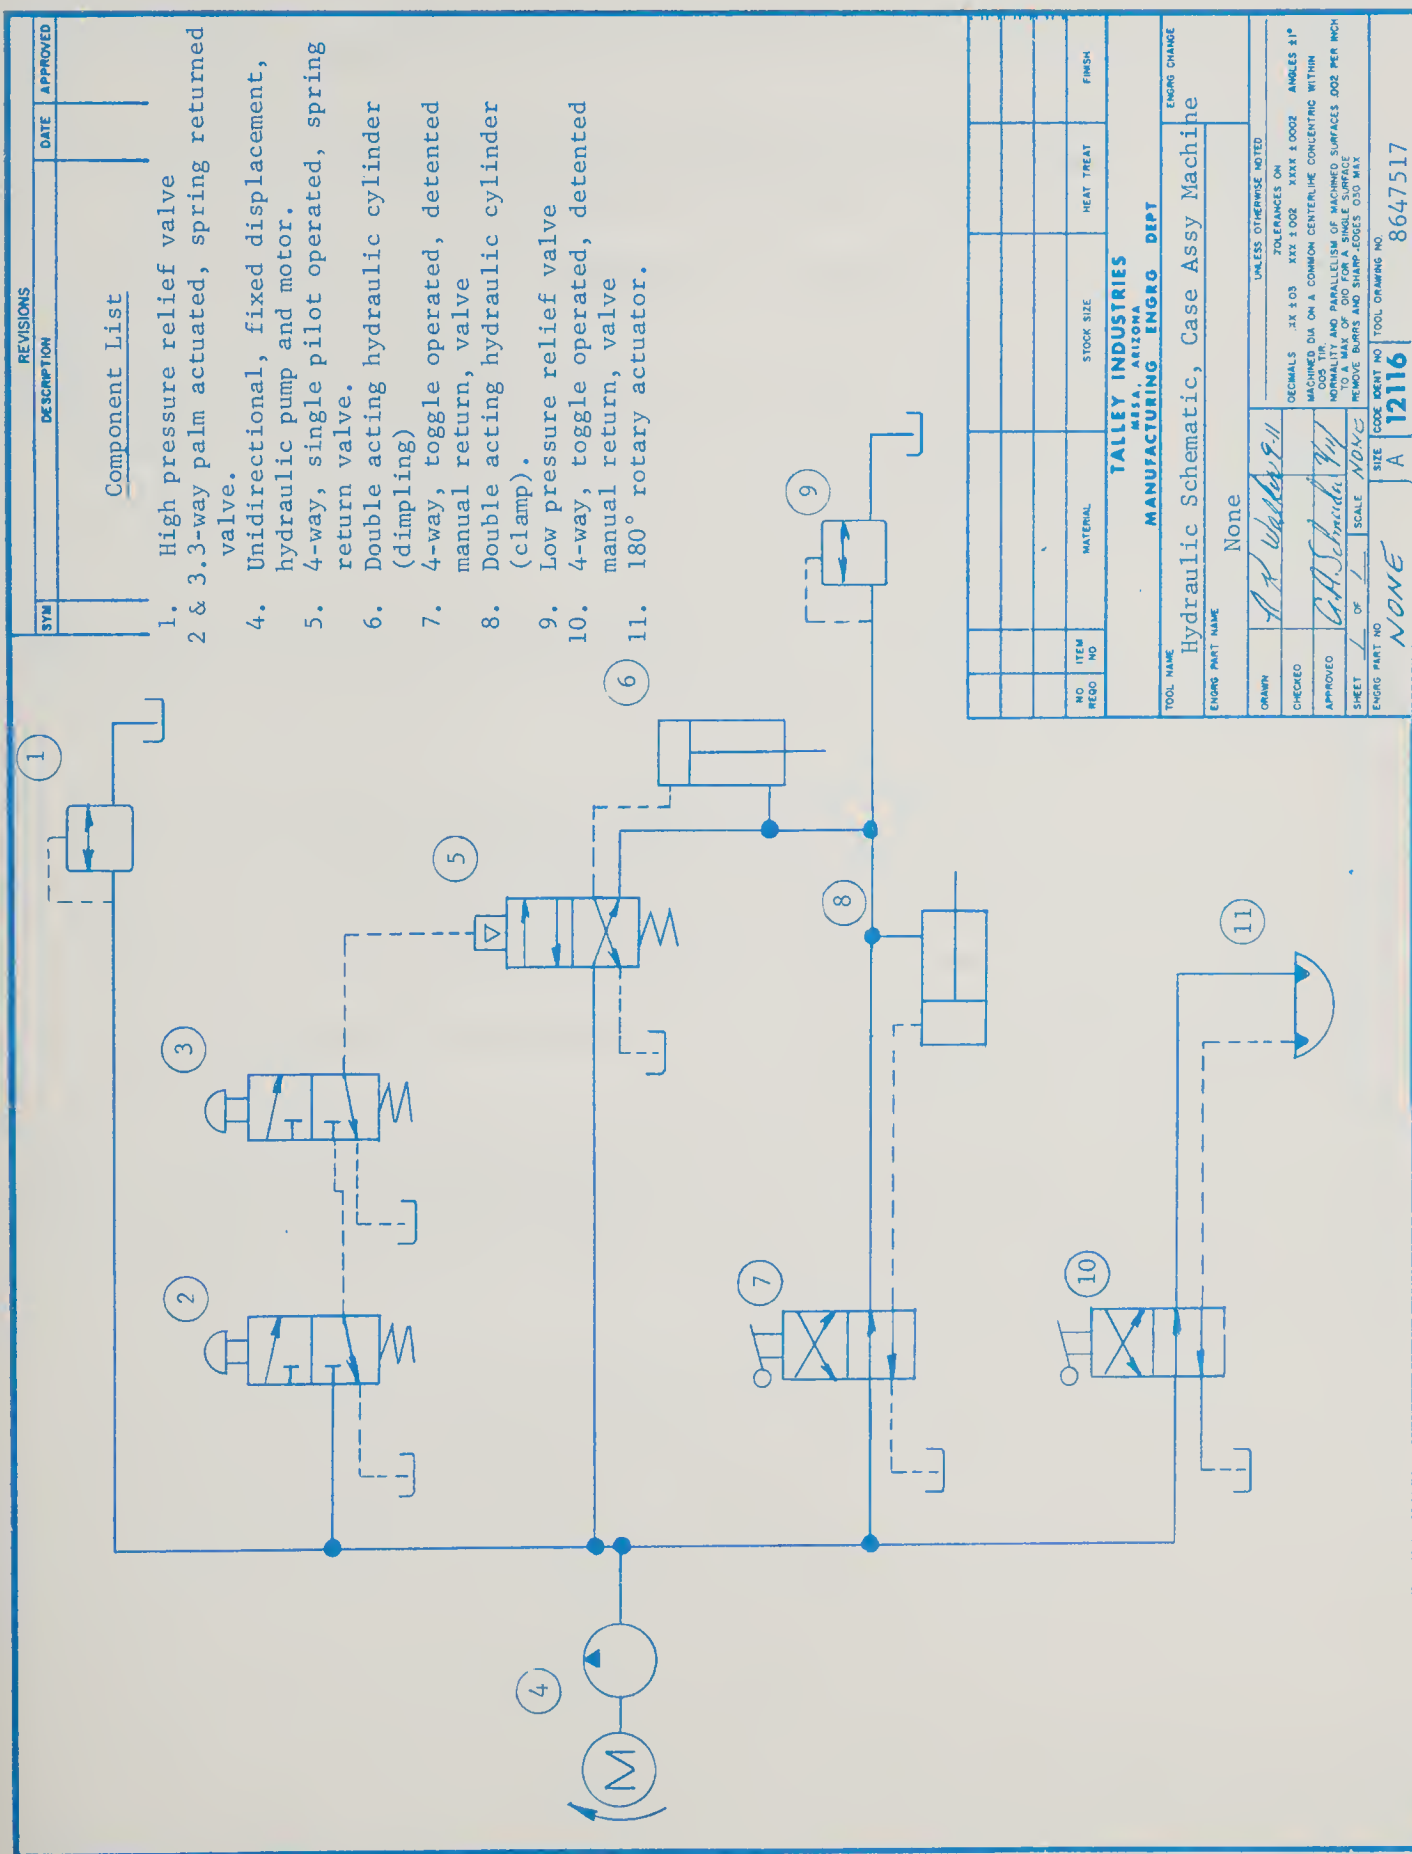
BPR-2. Industry blueprint. (Talley Industries)
